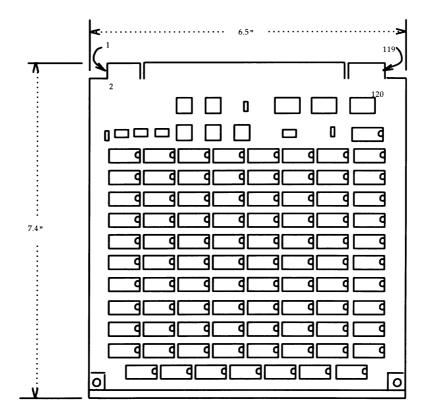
CM523B 2-Megabyte, Surface Mounted, RAM Card Layout
